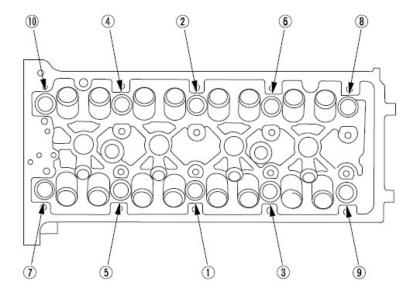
K20/K24 Cylinder Head Bolt Torque Sequence (OEM Pattern)
